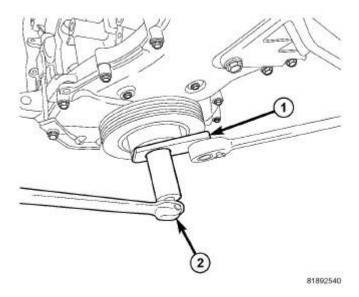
Removing/Installing Damper Bolt Courtesy of CHRYSLER GROUP, LLC
